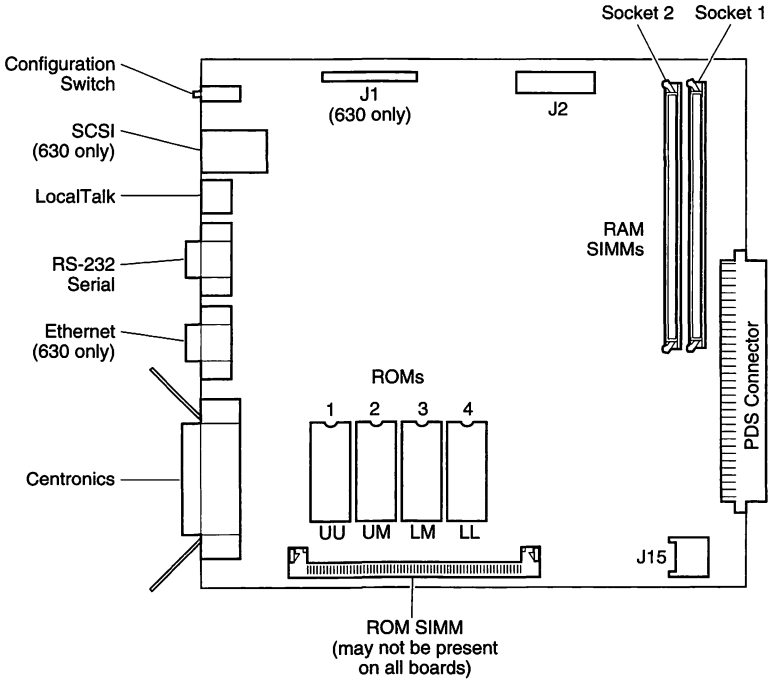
LaserWriter Pro 600 and 630 I/O Board
